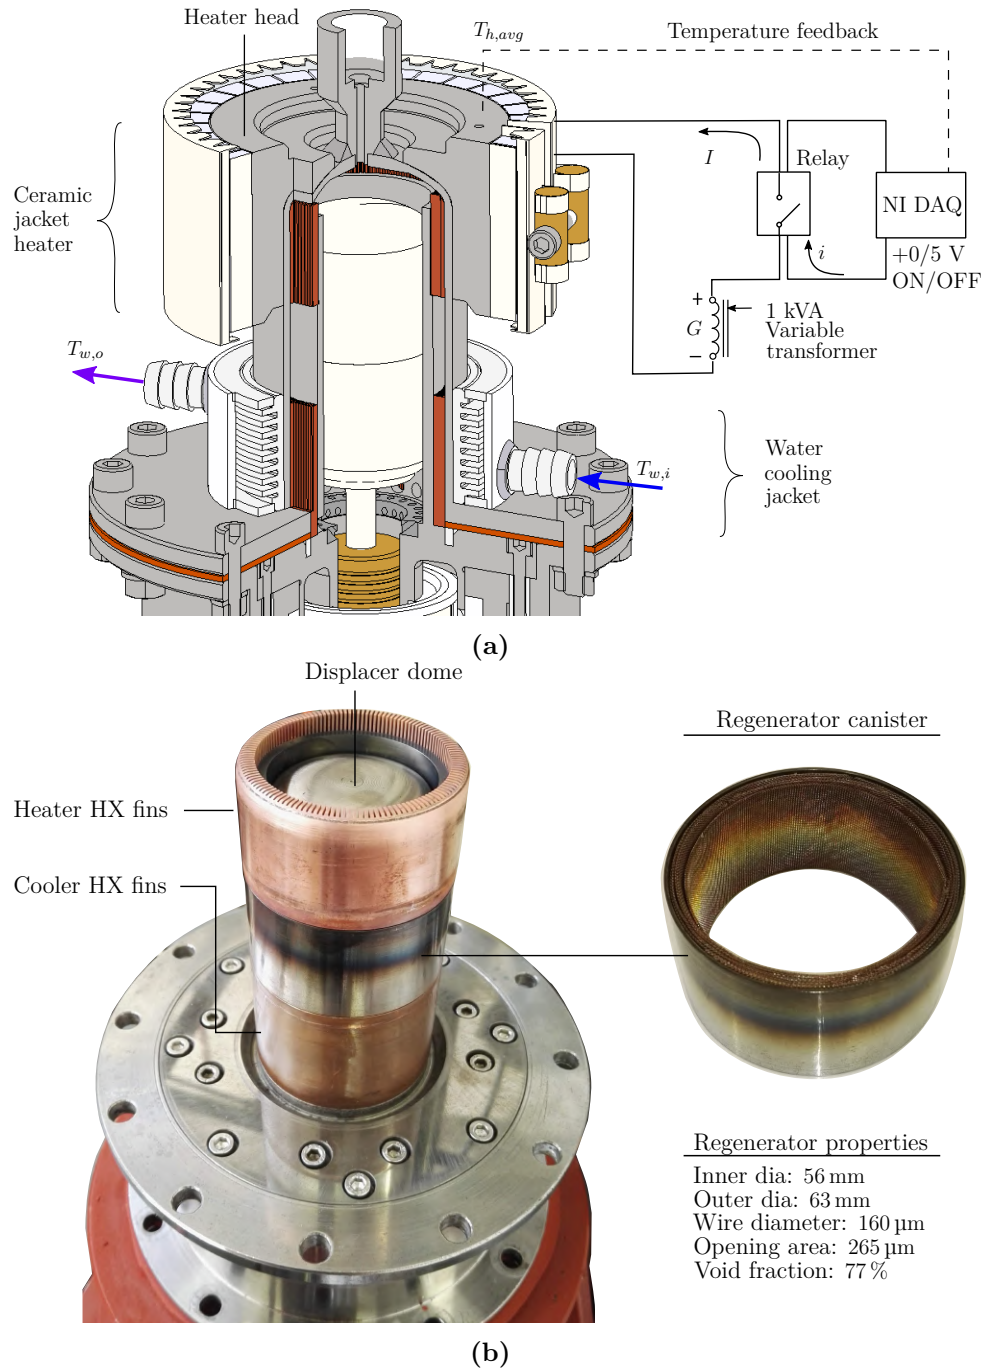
(a) Rendered illustration of the hot and cold ends with a schematic of the heater controller, (b) photograph of the uncovered heater and cooler fins with an enlarged view of the regenerator canister that is located in-between
